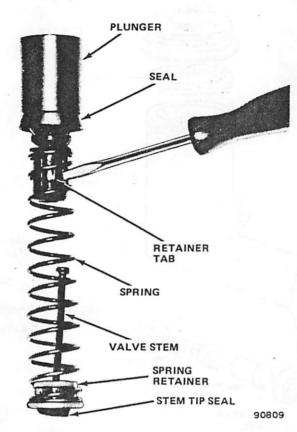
A-10 Removing Valve Spring and Stem from Plunger
